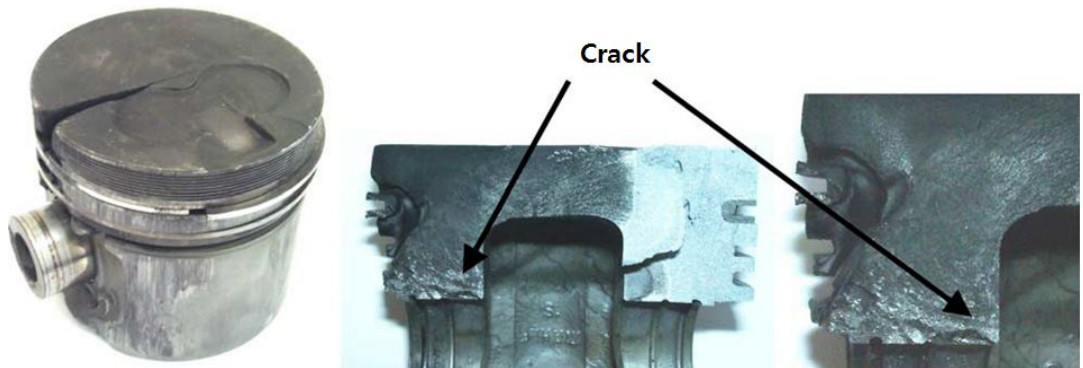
Petrol engine piston with a crack from one side of the pin hole to the head
